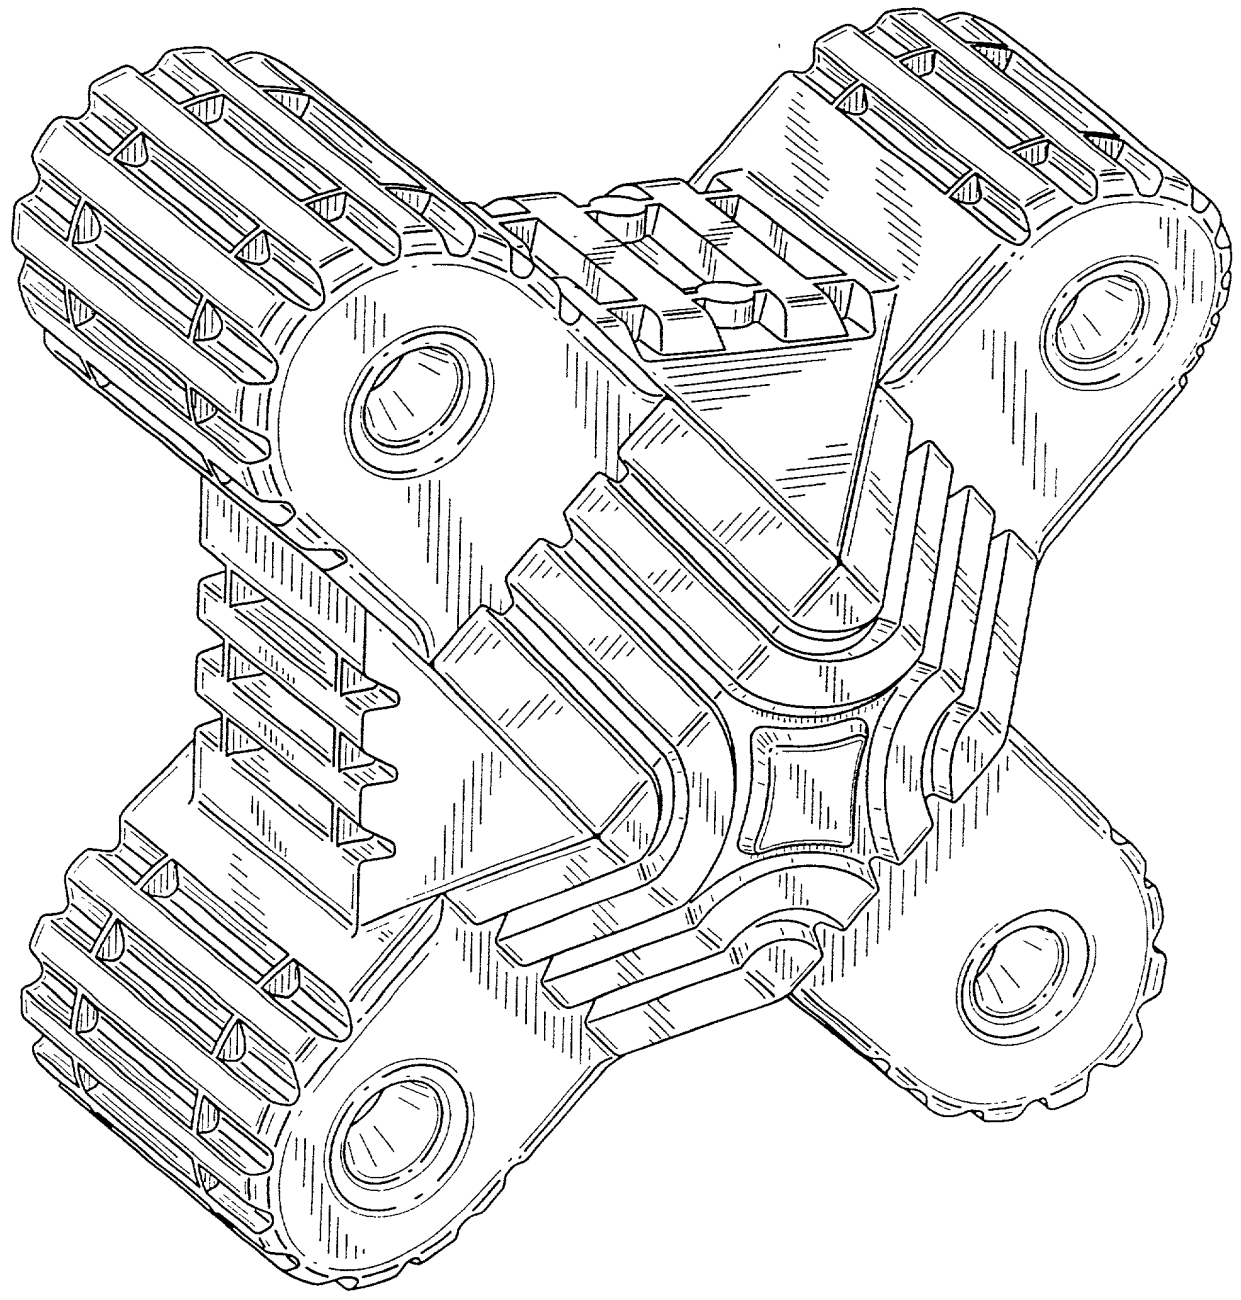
is a perspective view of the assembly shown in FIG. 1, taken from the front and to the right. The assembly consists of four main components arranged in a cross-like pattern. Each component has a circular base with a central hole and a series of rectangular protrusions along its outer edge. The components are interconnected by a central hub or bracket structure. The drawing uses perspective and hatching to show the three-dimensional form and shading of the parts.
